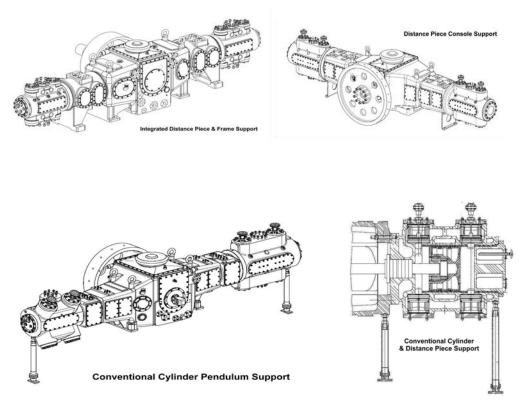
Different support configurations of cylinder crosshead of a horizontal compressor
